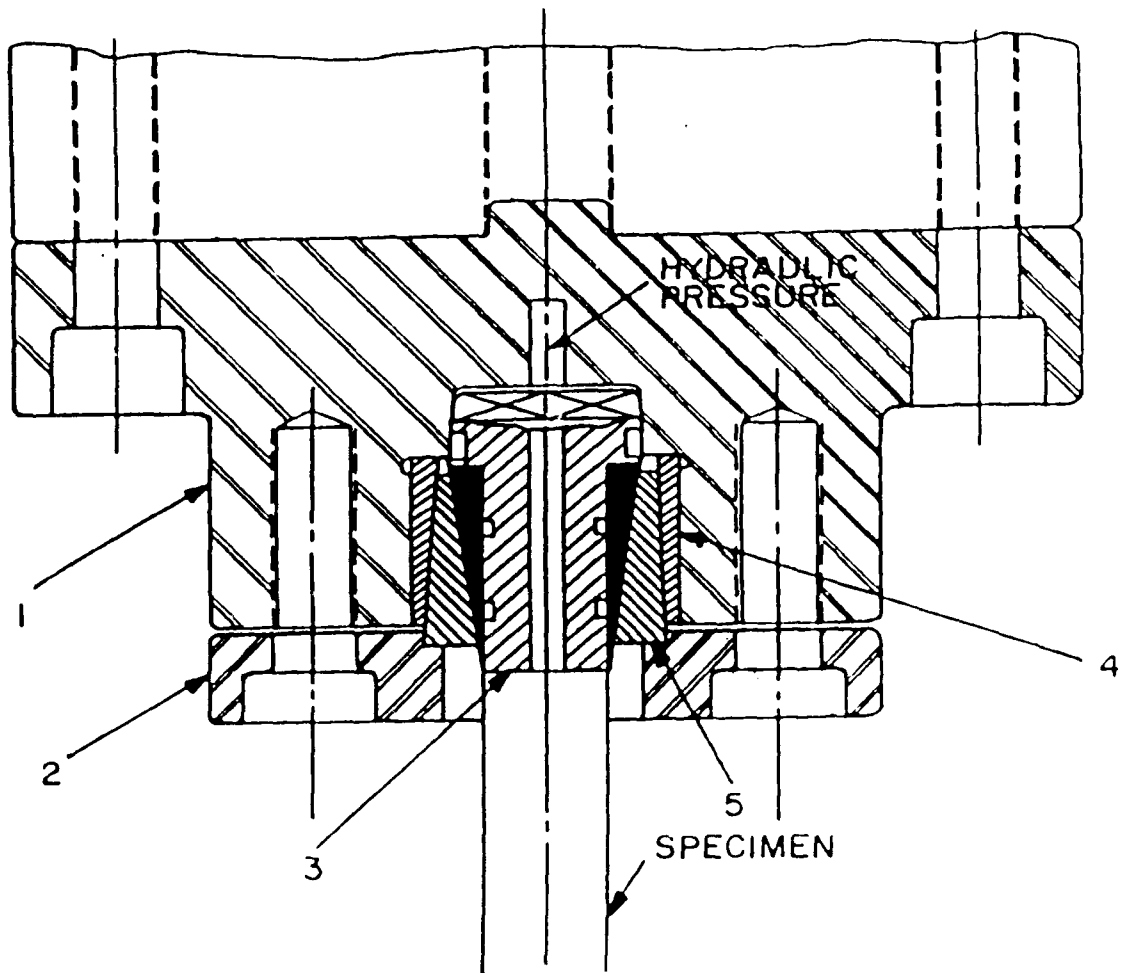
Assembly Drawing of Fixture: (1) Main Cylinder, (2) Cover Plate, (3) Insert with Square Ends, (4) Wedge, (5) Split Wedge
